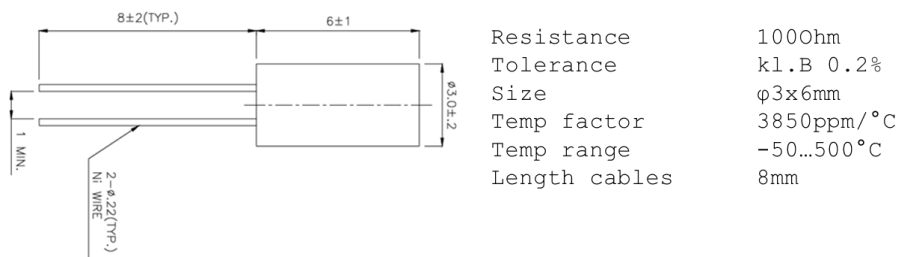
Technical sheet of the Pt100 RTD sensor installed into the test bench
